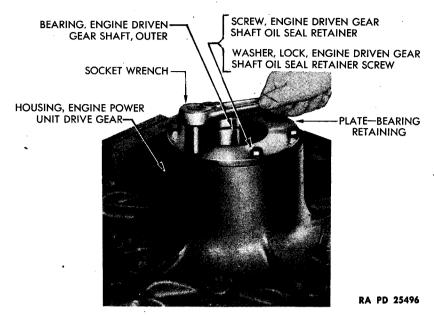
Bearing Retaining Plate In Position To Support Bearing
